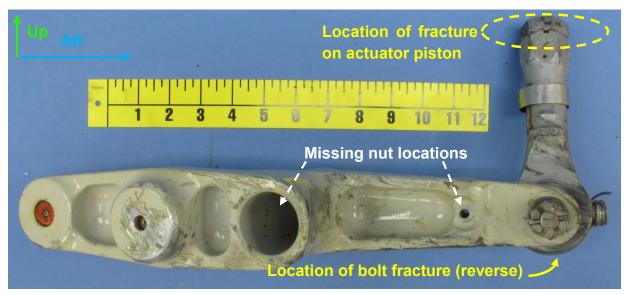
The collective lever arm assembly, after removal from the collective swashplate assembly and cleaning.
